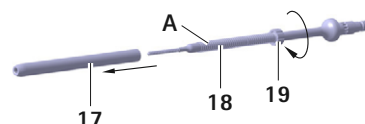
Disassembling the S<sup>4</sup>C tapper (Tap)
